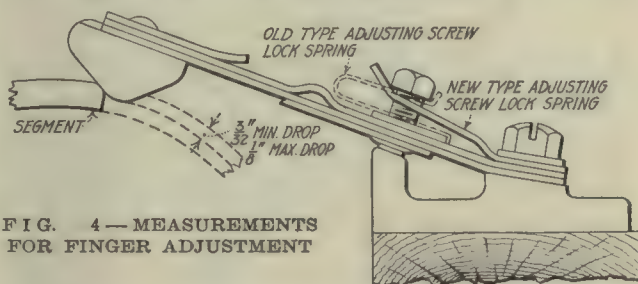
MEASUREMENTS FOR FINGER ADJUSTMENT
